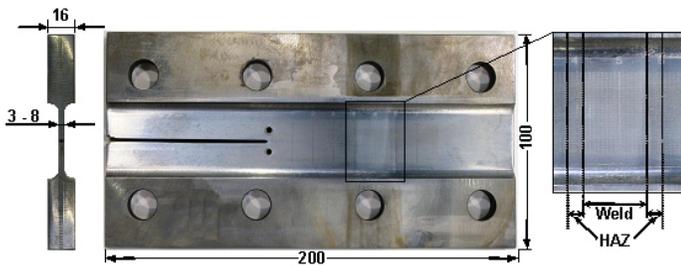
Image of the MDCB specimen showing the orientation and location of the girth weld in a typical specimen. (Dimensions in mm.)
